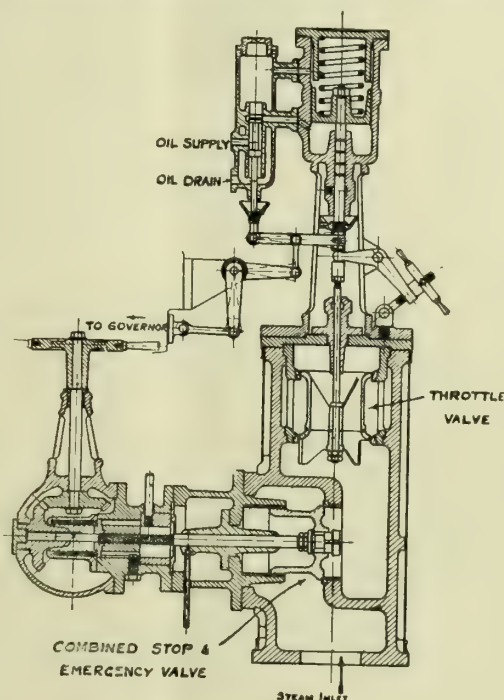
THE STOP AND THROTTLE VALVES FOR A HIGH-PRESSURE FRASER AND CHALMERS TURBINE.
